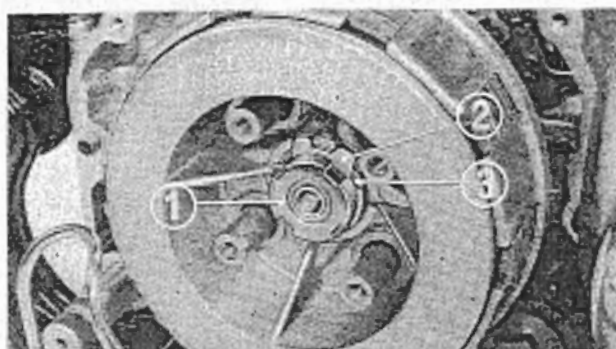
① 16mm lock nut ③ Lock washer
